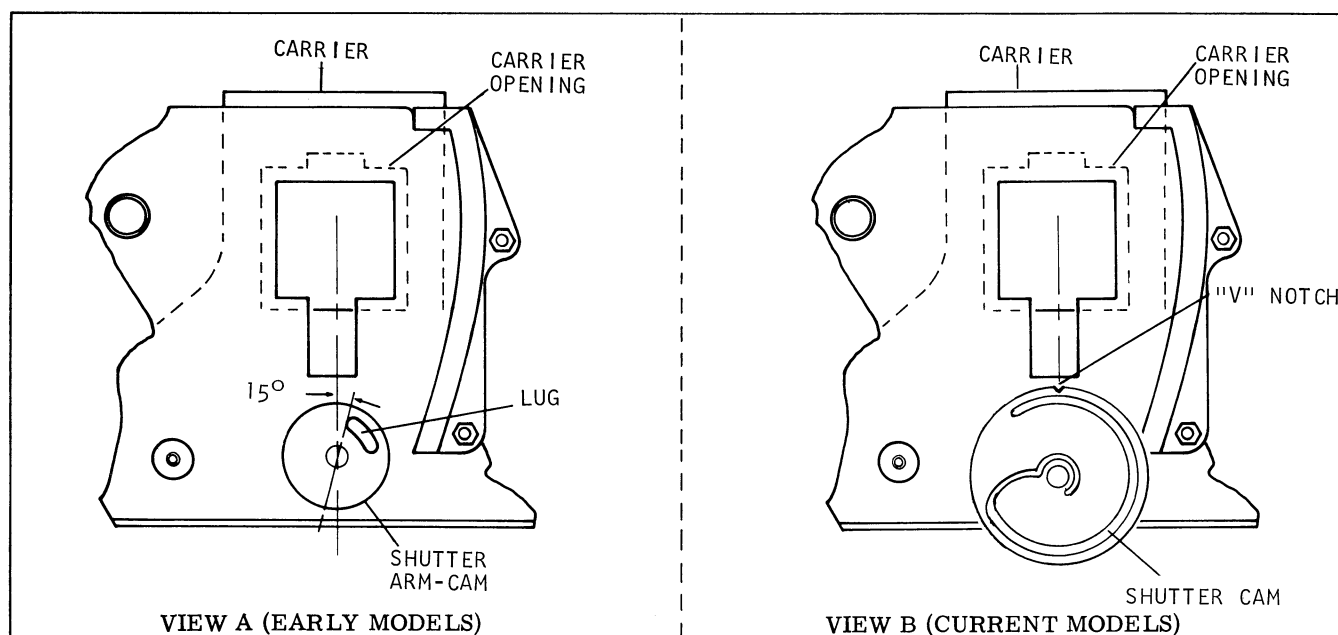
Figure K. Aligning Slide Carrier and Shuttle Arm Cam
